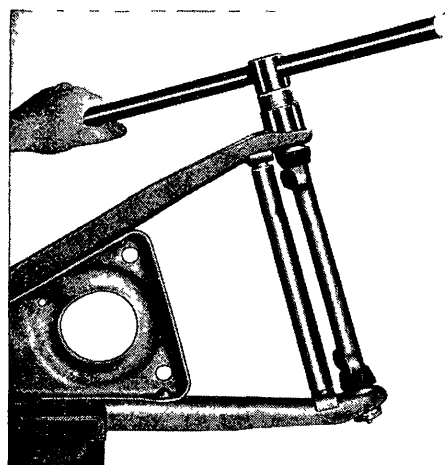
Using spreader tool to prevent lower control arms from moving inward while installing bushings, 1937-52
